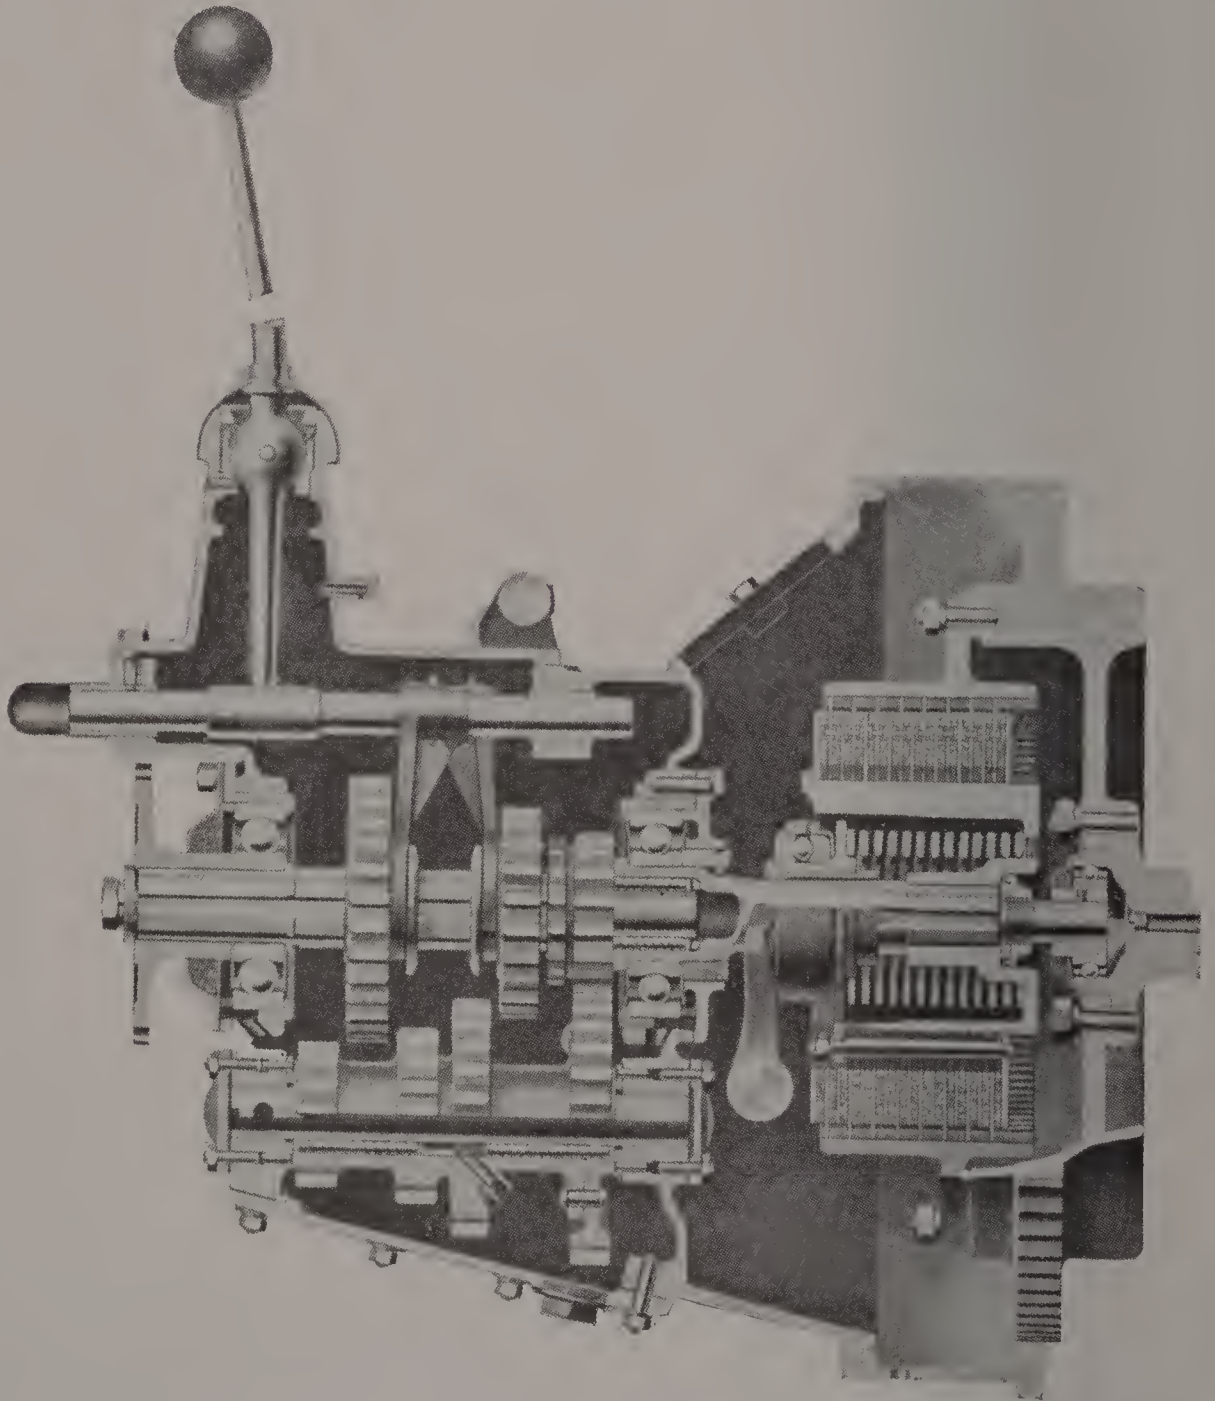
SECTIONAL VIEW OF A STANDARD CLUTCH AND GEARSET
